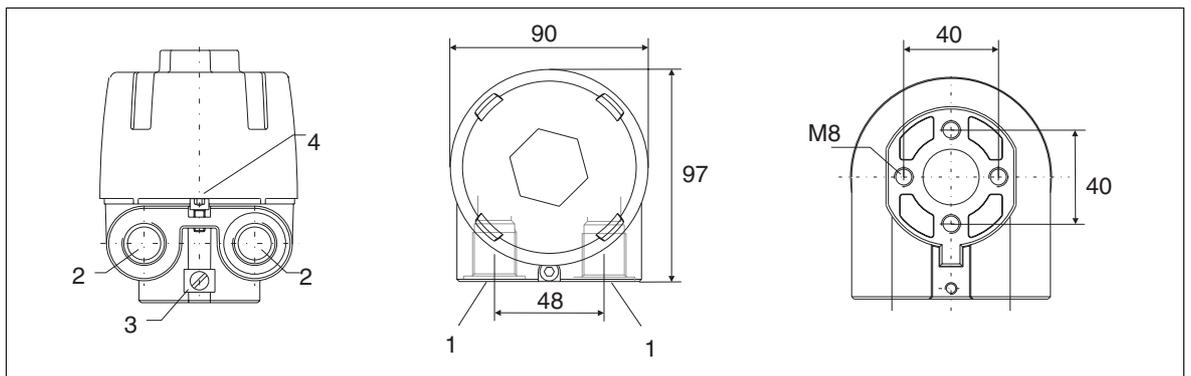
TF202 / TF202-Ex Dimensional drawing (all dimensions in mm)
